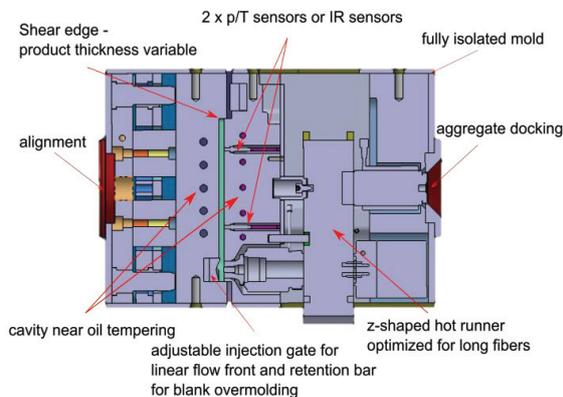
Mold 1 for hybrid plate manufacturing – Visualized is a section profile of the mold
